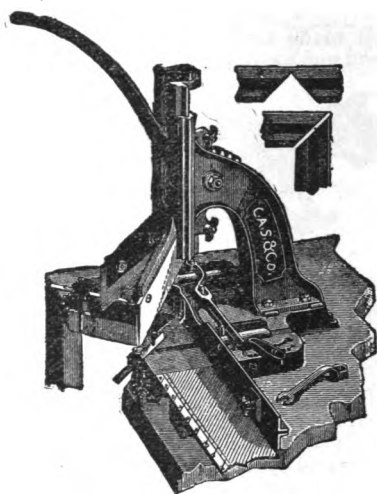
ADJUSTABLE JOINT CUTTER AND PLANER.
